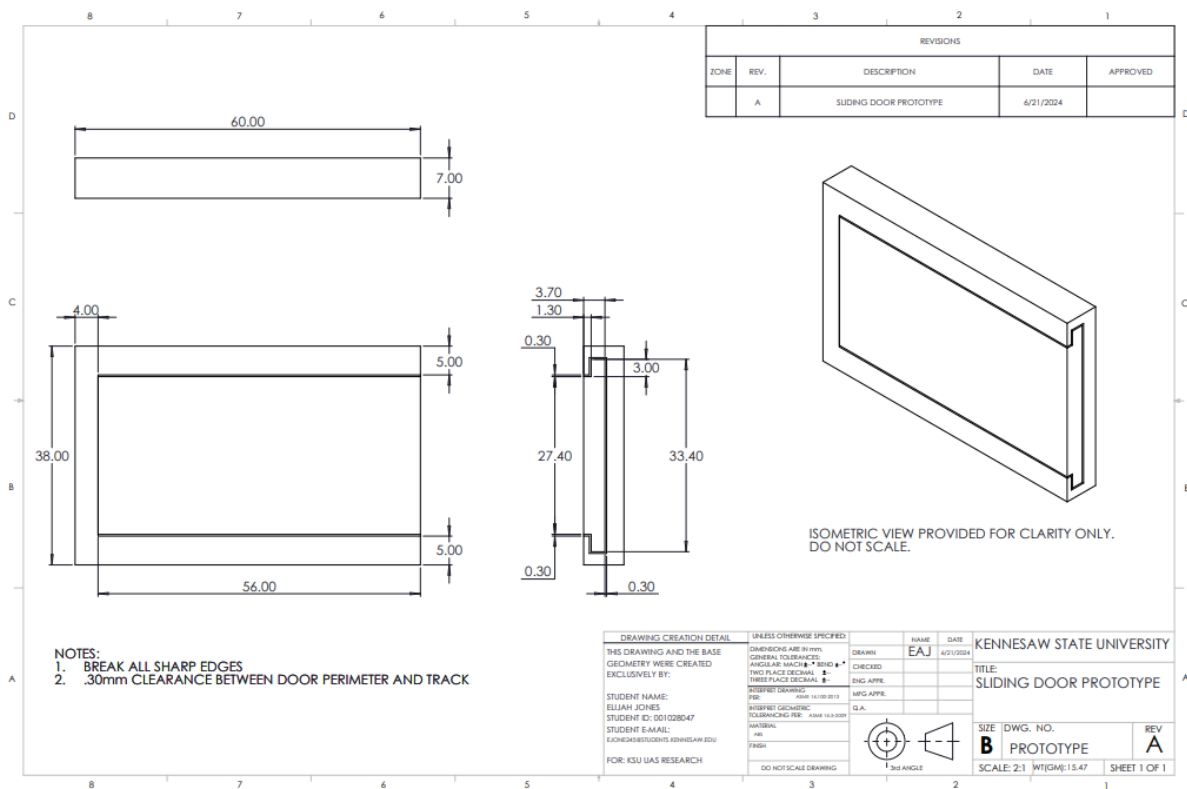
Technical Drawing of Prototype Sliding Door Assembly
